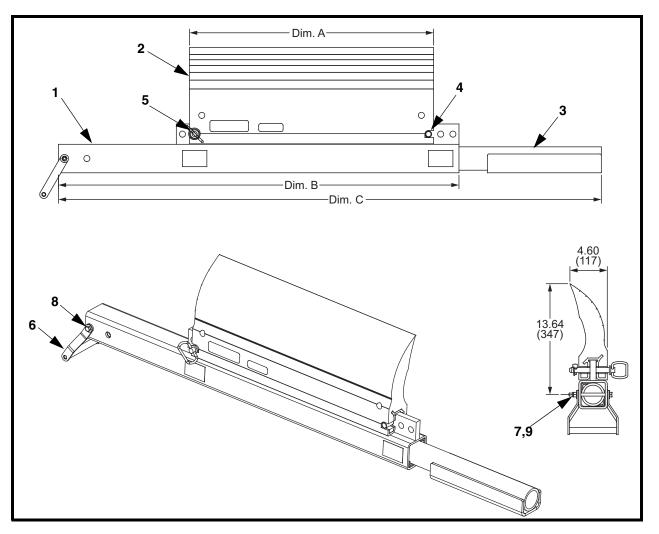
Martin[®] QC1TM Cleaner XHD STS Assembly, P/N STSXHDQC-XXXXXXXXX
